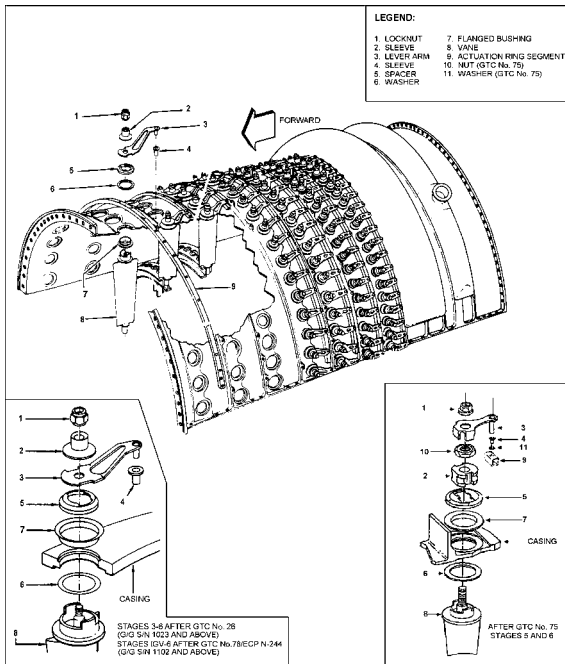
IGV through Stage 6 Variable Vane Assembly
